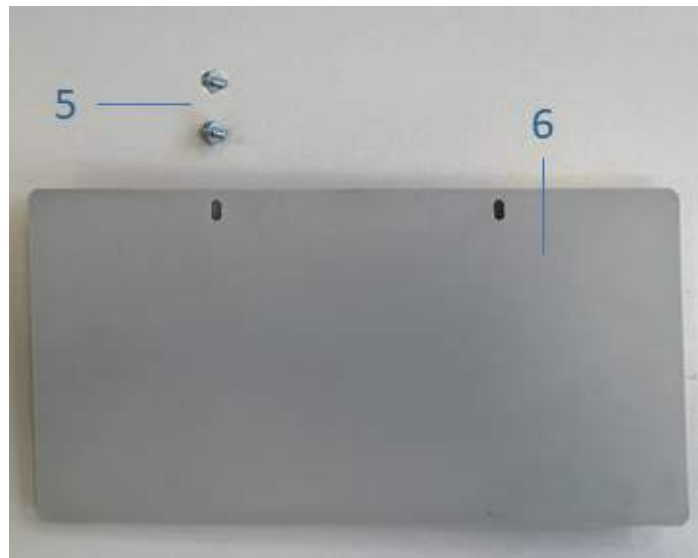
Wi-Fi + BT Modem Module Assembly Parts
